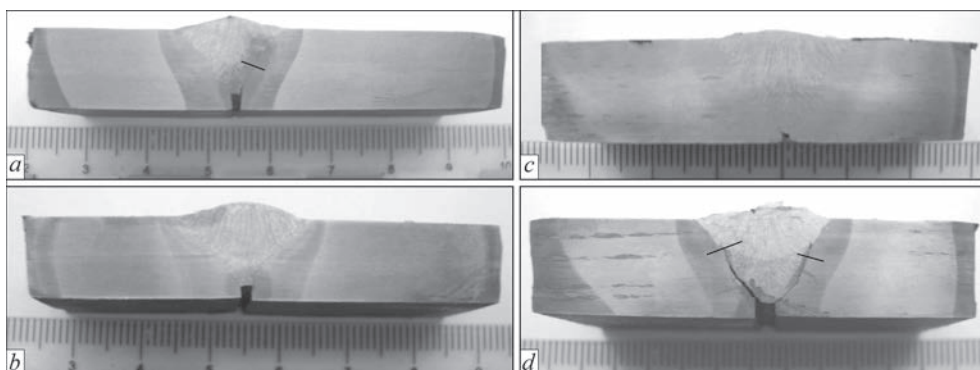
Macrosections of welded joints of foreign armour steels in welding by Sv-10GSMT wire: *a* — *HB 500 MOD* without preheating, cold cracks in the HAZ; *b* — *HB 500 MOD*, $T_{pr} = 150\text{ }^{\circ}\text{C}$; no cracks; *c* — *PROTECTION 500*, $T_{pr} = 200\text{ }^{\circ}\text{C}$, no cracks; *d* — *ARMSTAL 500*, $T_{pr} = 100\text{ }^{\circ}\text{C}$, cold cracks in the HAZ
